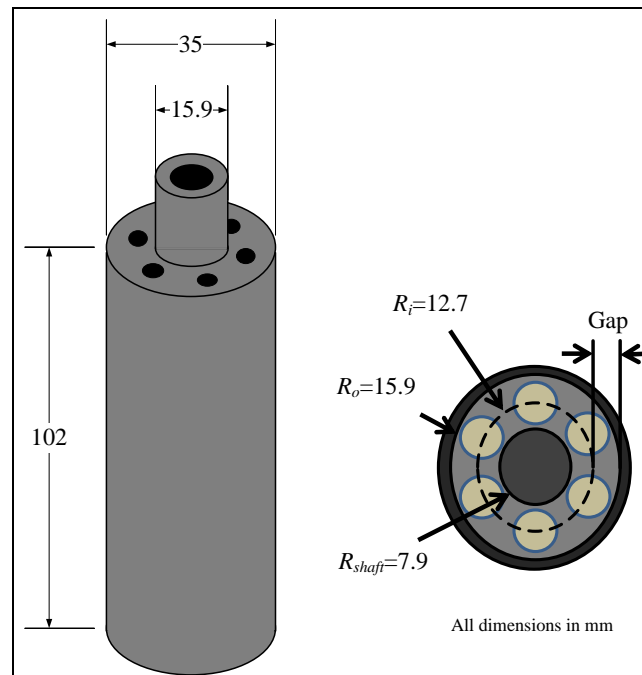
Dimensioned drawing of rotating hollow cylinder (mm)
